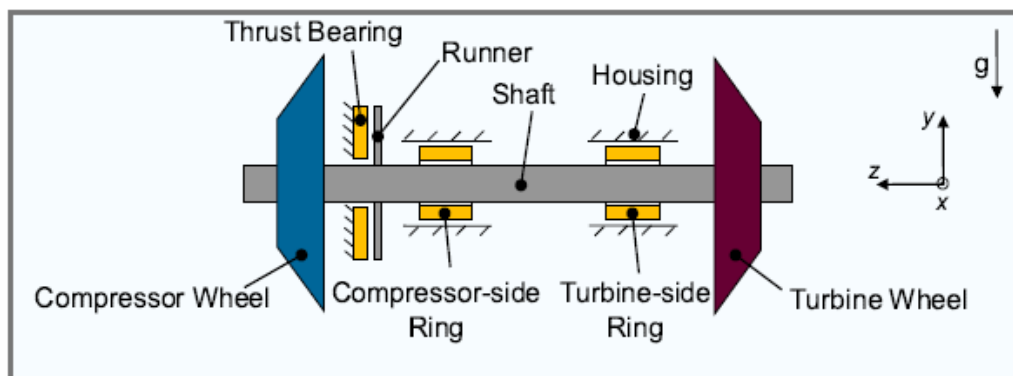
Schematic drawing of a turbocharger rotor-bearing system.
